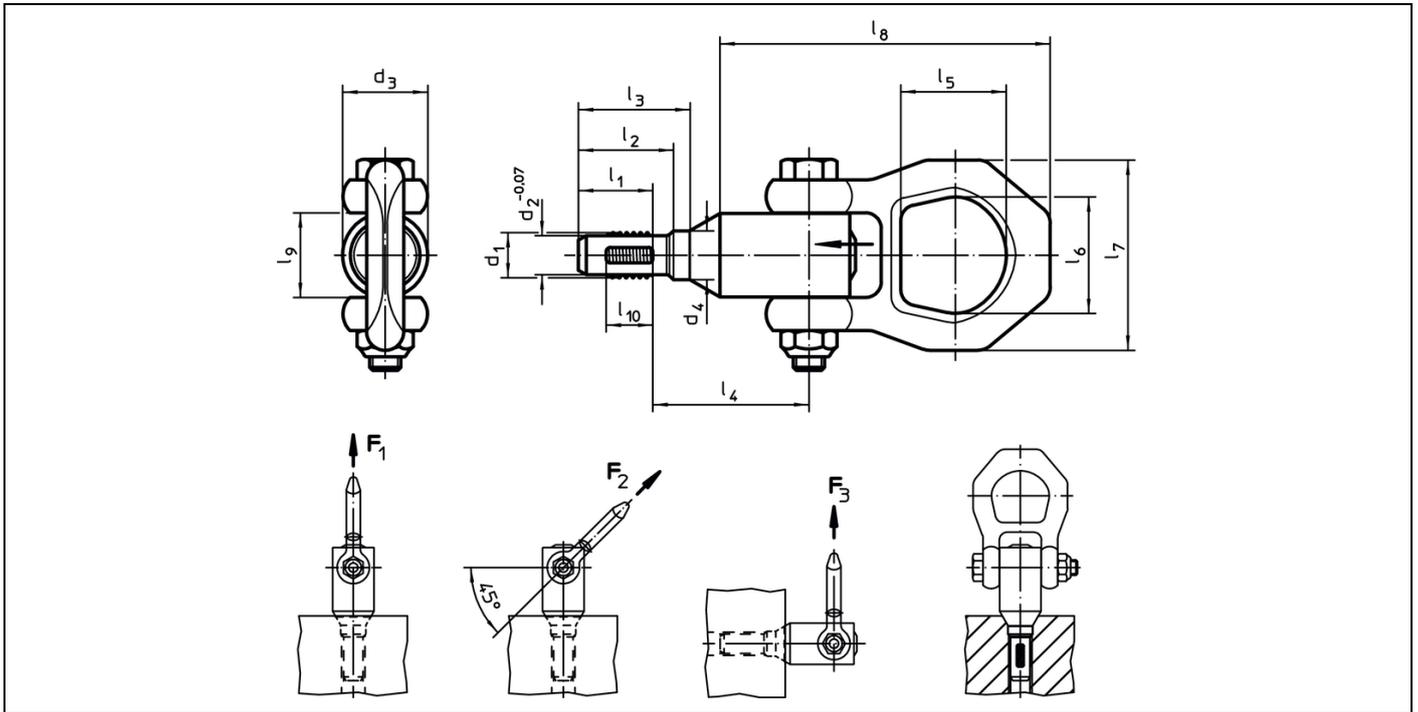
Dimensional Drawing - threaded lifting pins, self-locking, for centre holes according to DIN 332
